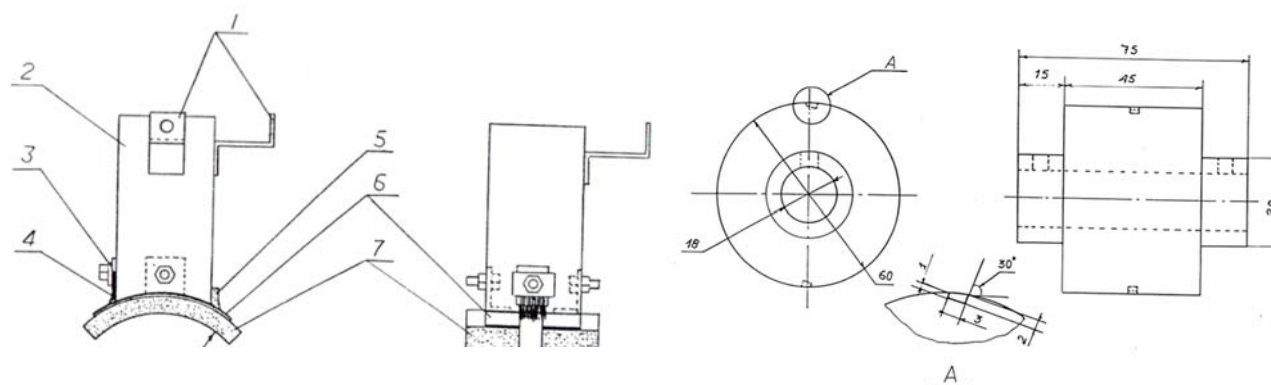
Assembly drawing of the cabbage seeder, featuring a PVC metering roller for seed dispensing
